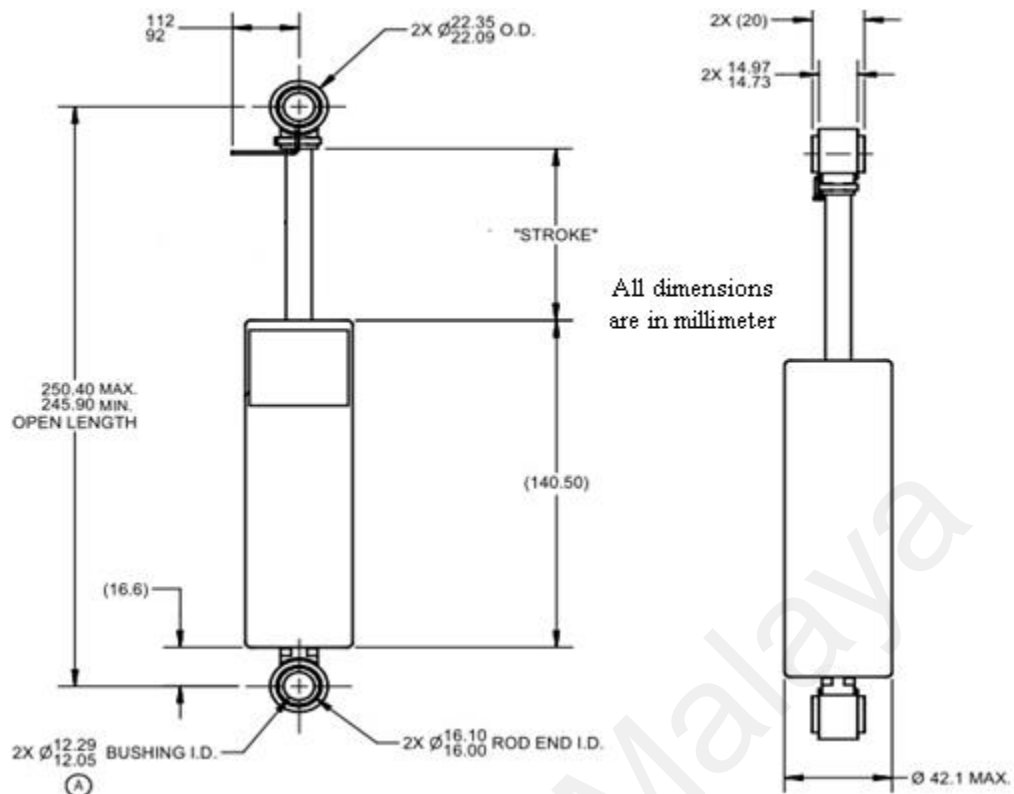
MR damper assembly drawing (courtesy: LORD technical data sheet for RD-8041-1)
